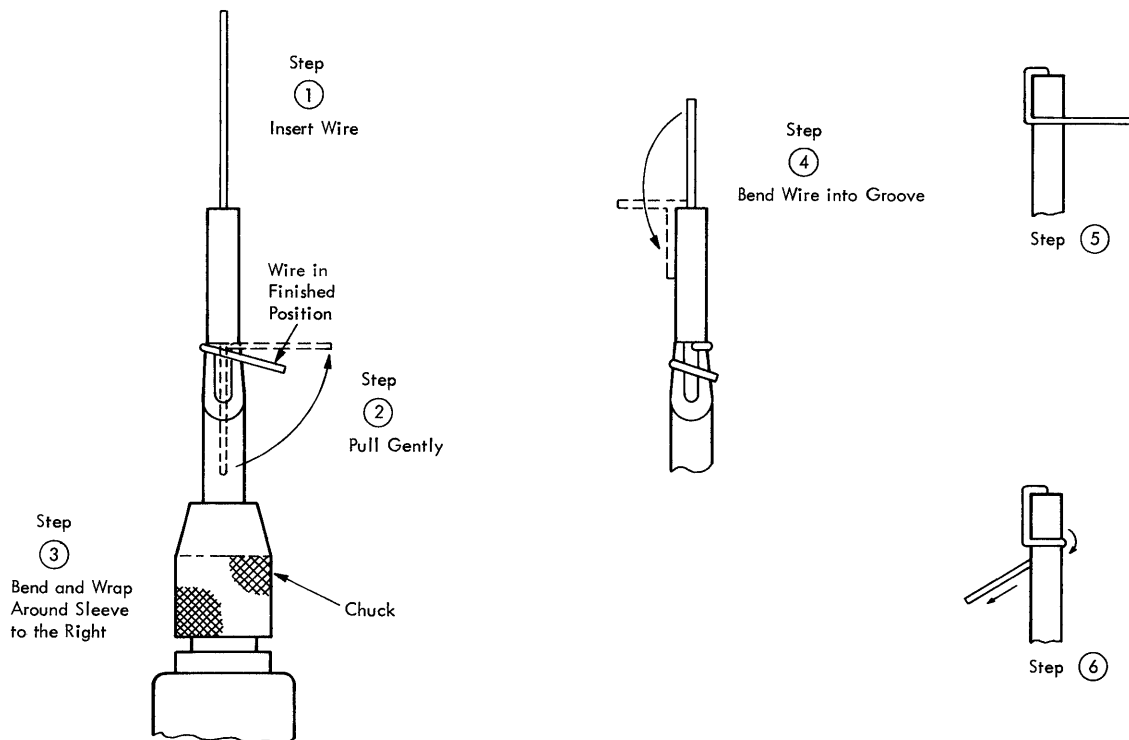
Preparing Power-driven Wire-Wrapping Tool
